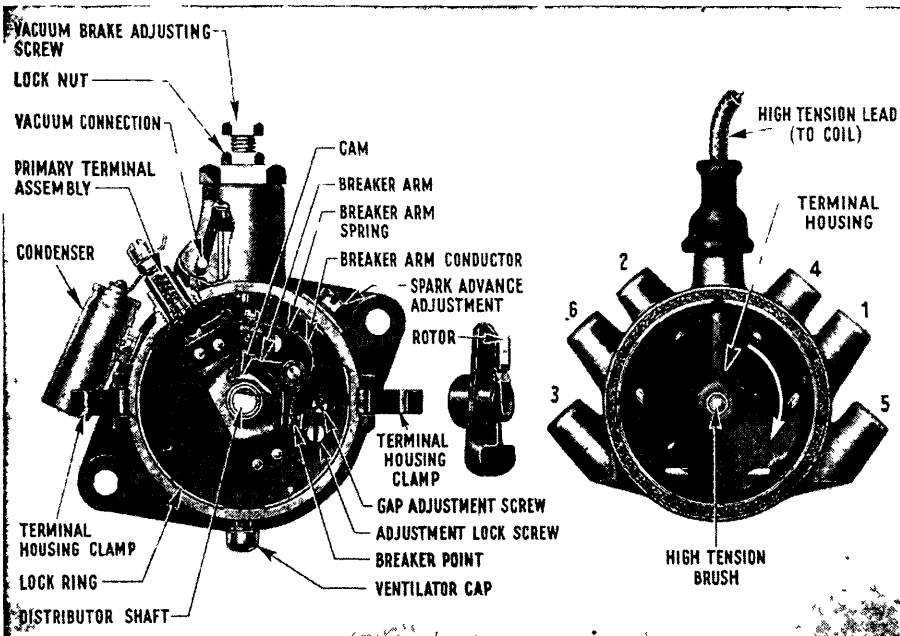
Ford vacuum brake type distributor, 1941-47 six-cylinder
